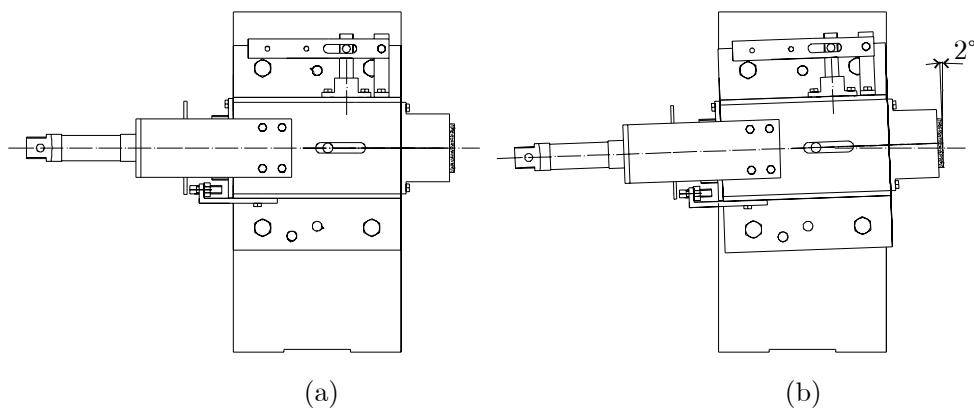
Rotation of the grinding wheel: abrasive wheel perpendicular to the disk surface (a); Abrasive wheel tilted of 2° on a plane tangent to the disk edge (b)
